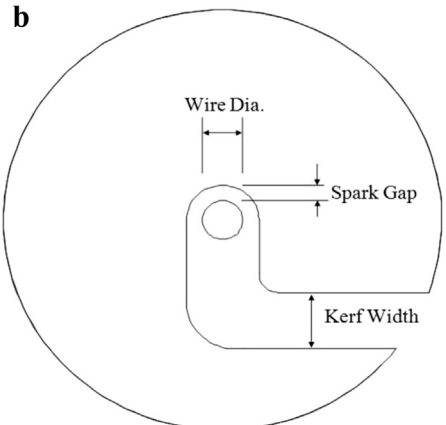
a. CMM measuring kerf of the machined workpiece. b. Kerf width. c. Machining profile of the workpiece.
